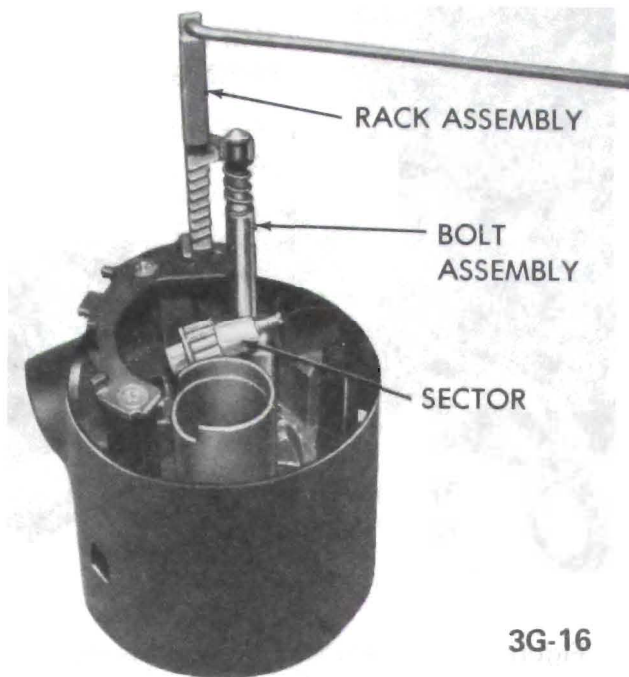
G-16 Removing or Installing Rack and Lock Bolt
